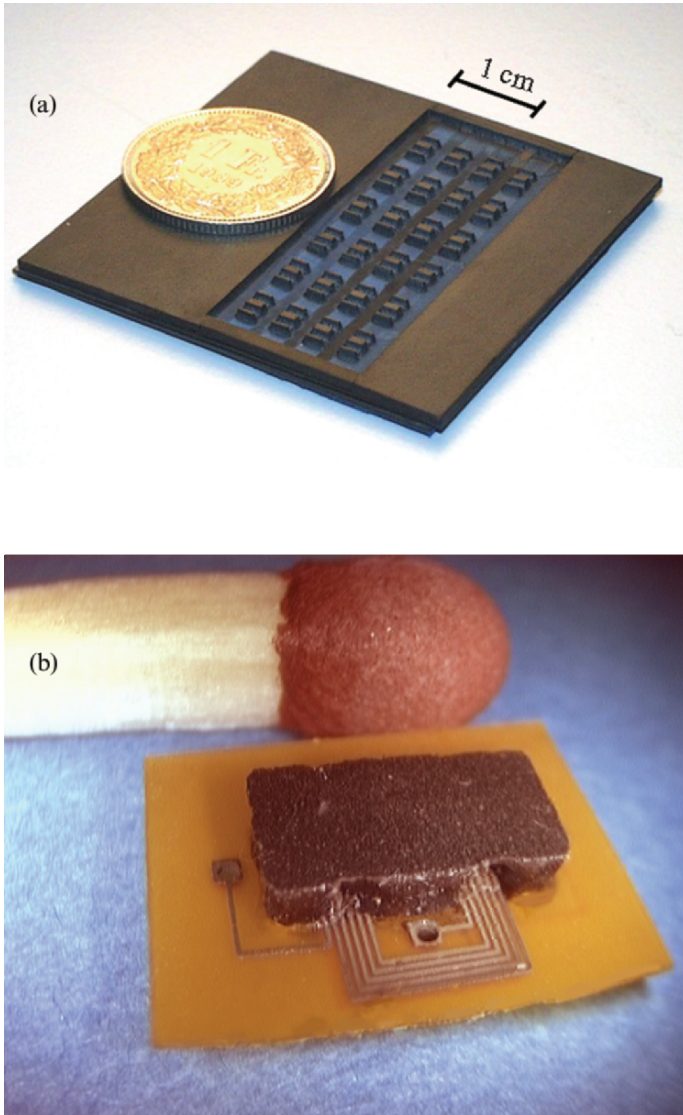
(a) Photograph of an array of identical E-cores patterned into a ferrite wafer by powder blasting. (b) Assembled transformer consisting of two E-cores and windings realized in PCB technology. (Reprinted from Amalou et al.<sup>58</sup> With permission.)
